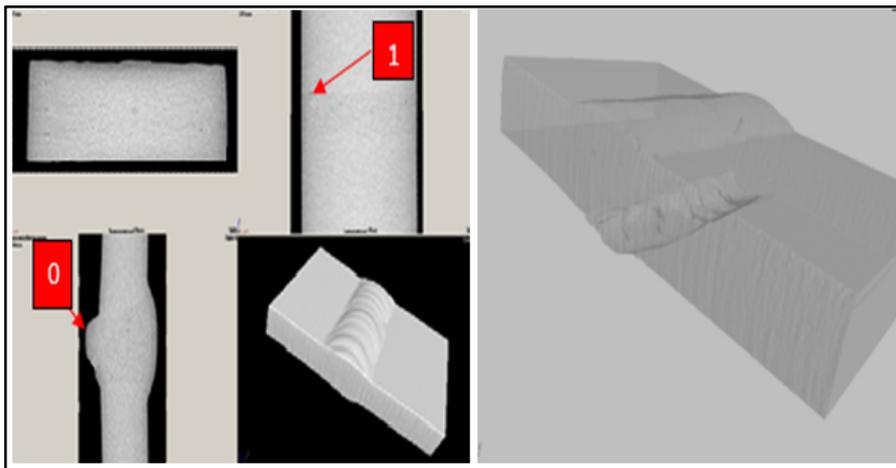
SPV weld sample no. 1 tomograph (0-weld root excess bead; 1-gas pores) [1]
